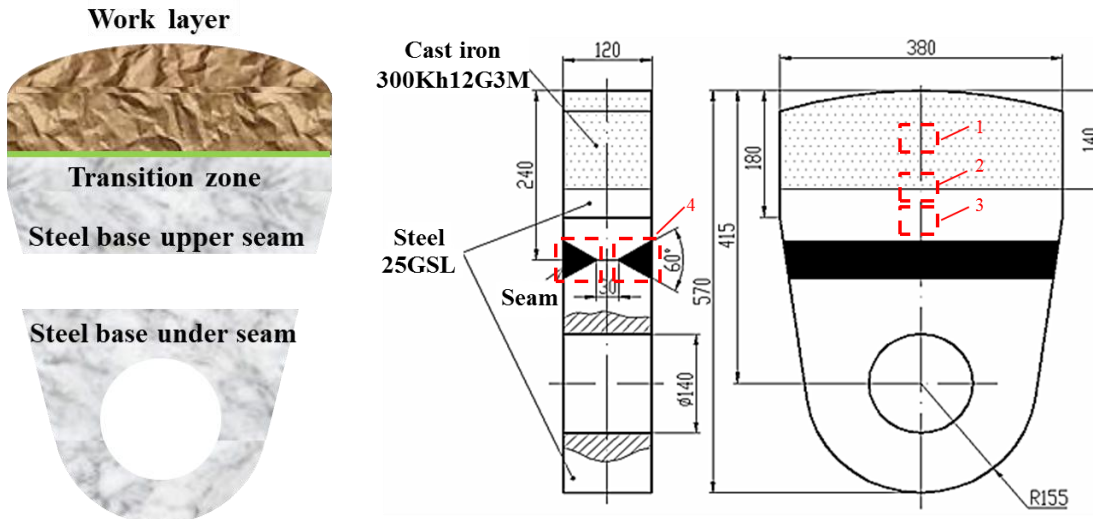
Cast-welded bimetallic construction “Hammer” of hammer crushers
